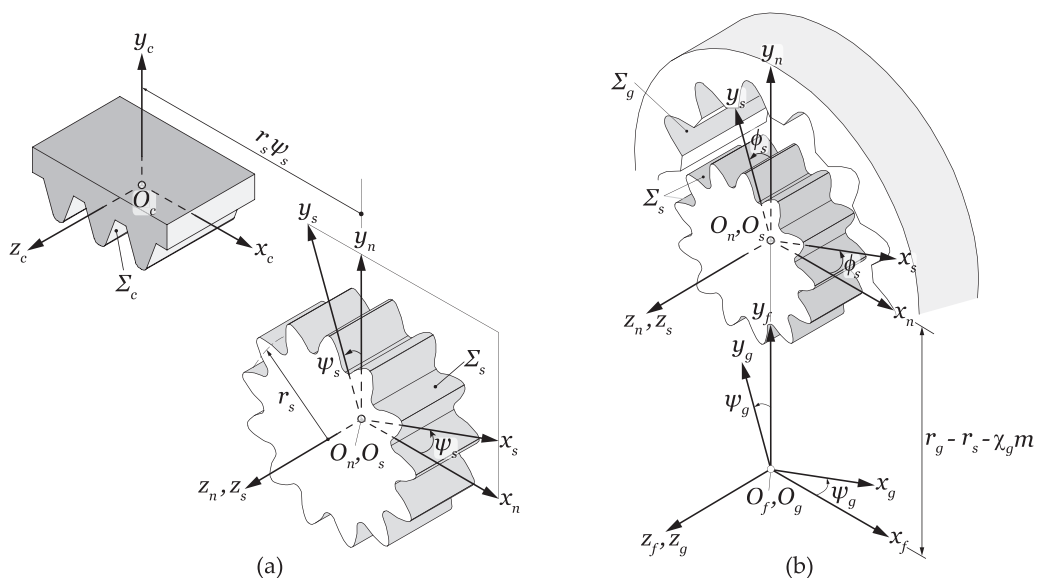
Definition of the sleeve model: (a) generation of the shaper tooth surface Σ_s , and (b) generation of the sleeve tooth surface Σ_g .
